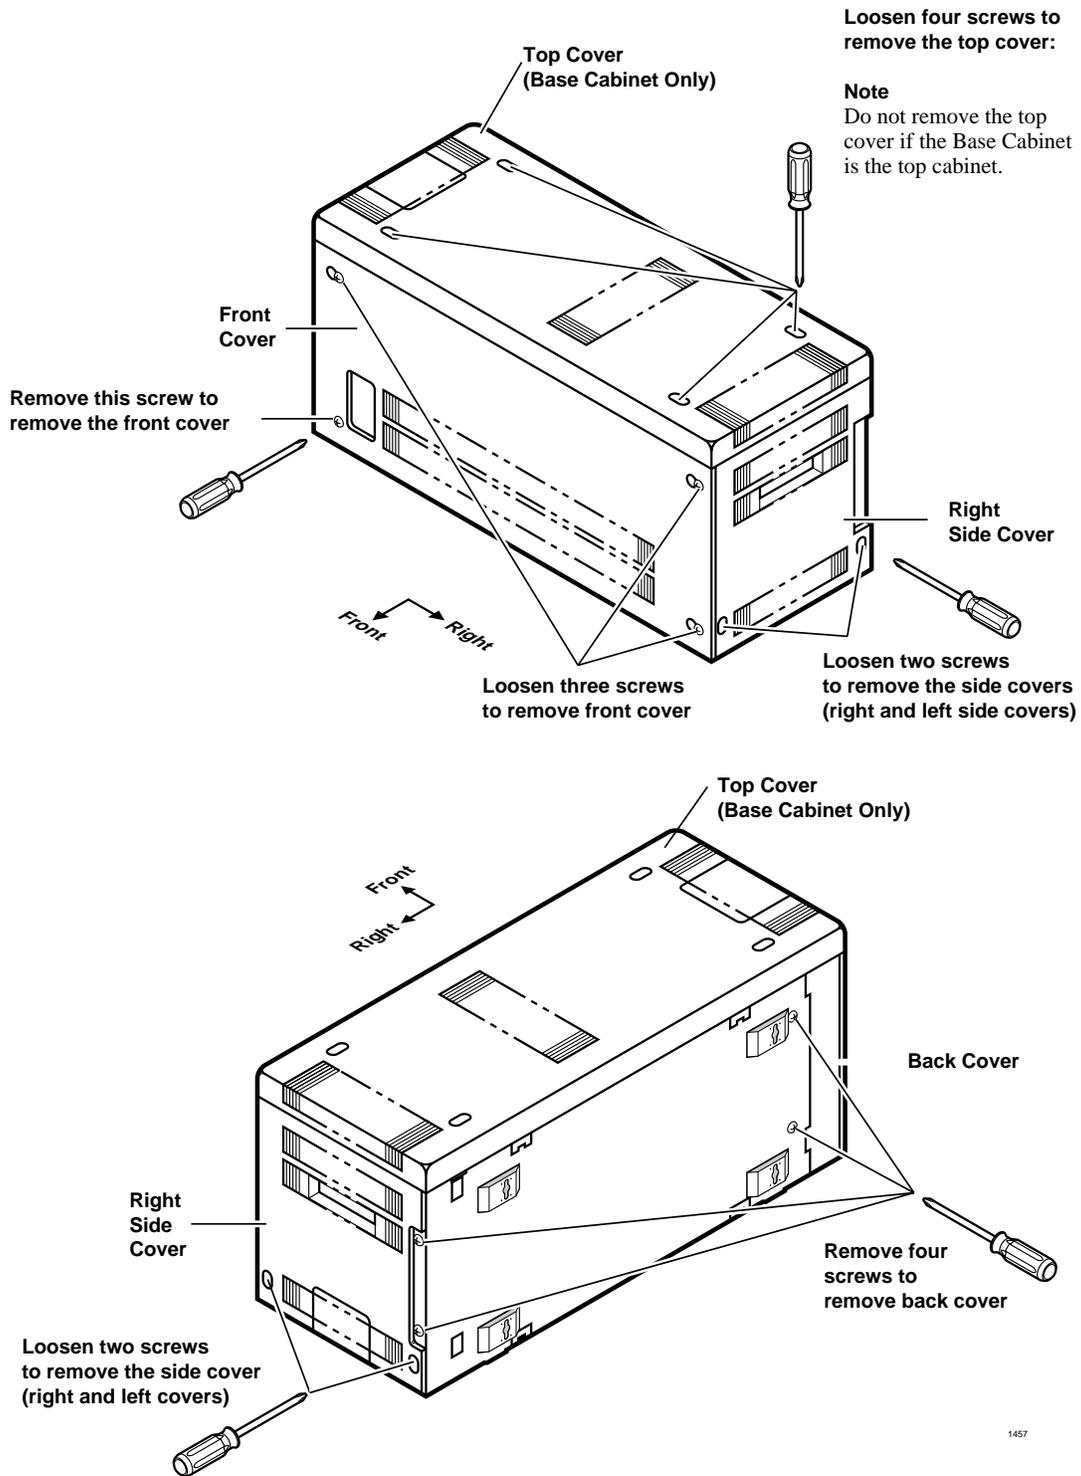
DK424 Cabinet Cover Removal and Installation
